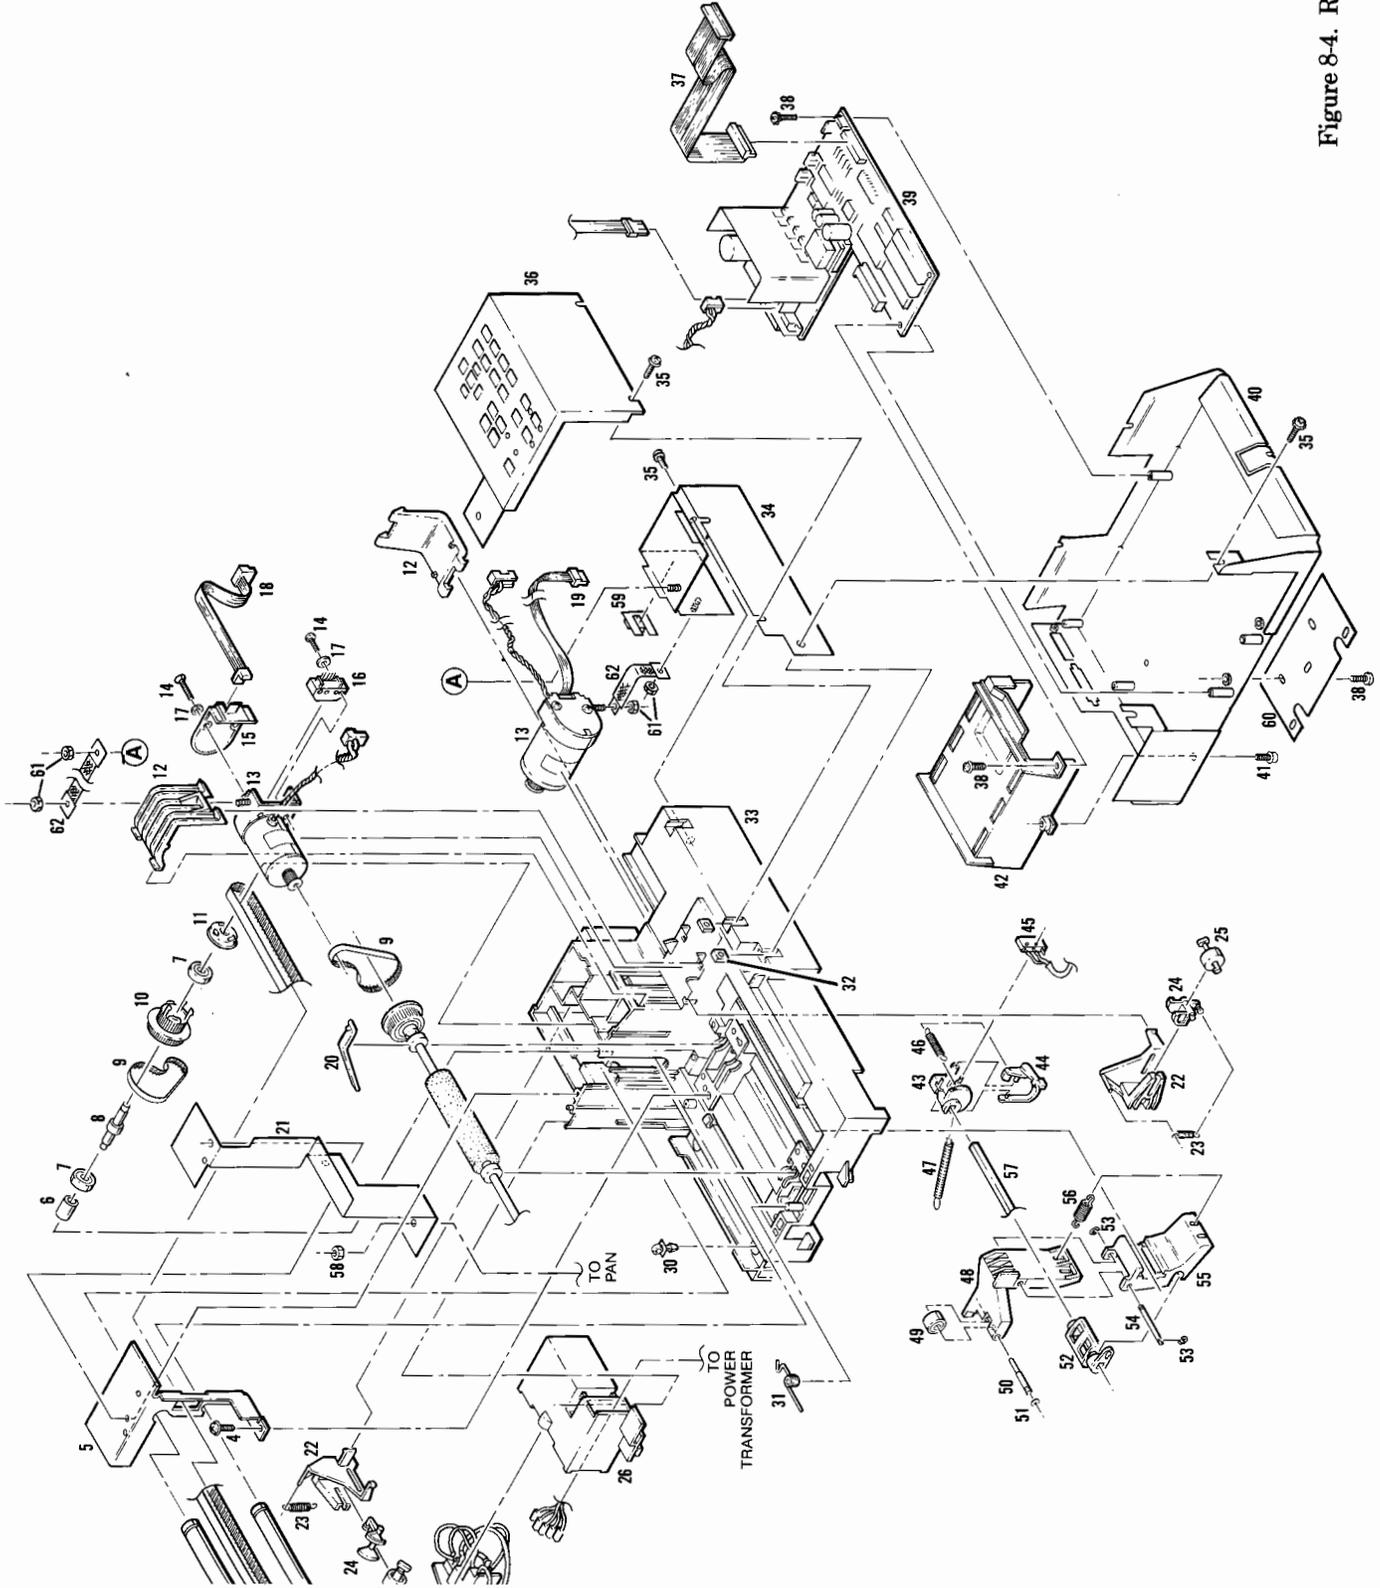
Right-Hand Chassis Assembly, Illustrated Parts Breakout
